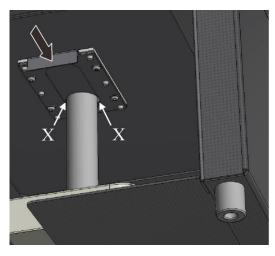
Closing the slider for sealing the opening (similar to picture)
